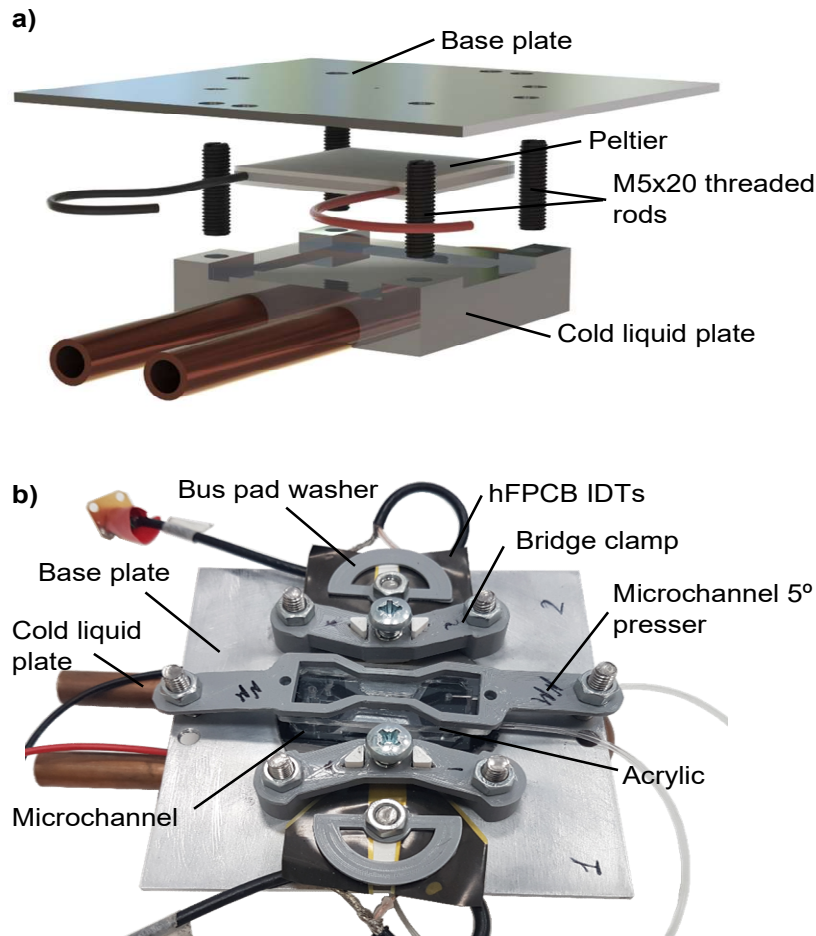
a) SAW cooling system (S-CS) components and assembly. b) Real-life model of the hFPCB-SAW device assembly on top of the S-CS.
